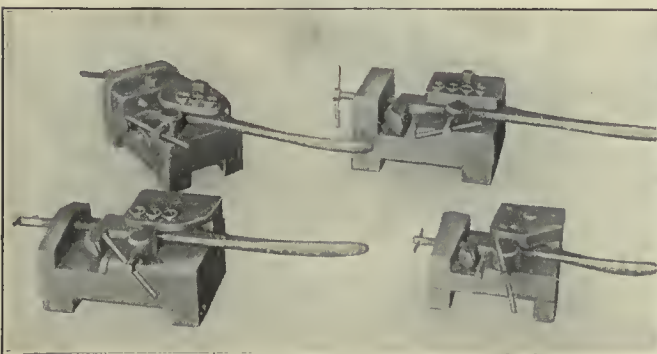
JIGS FOR PIVOT-SHIFTING HOLES
